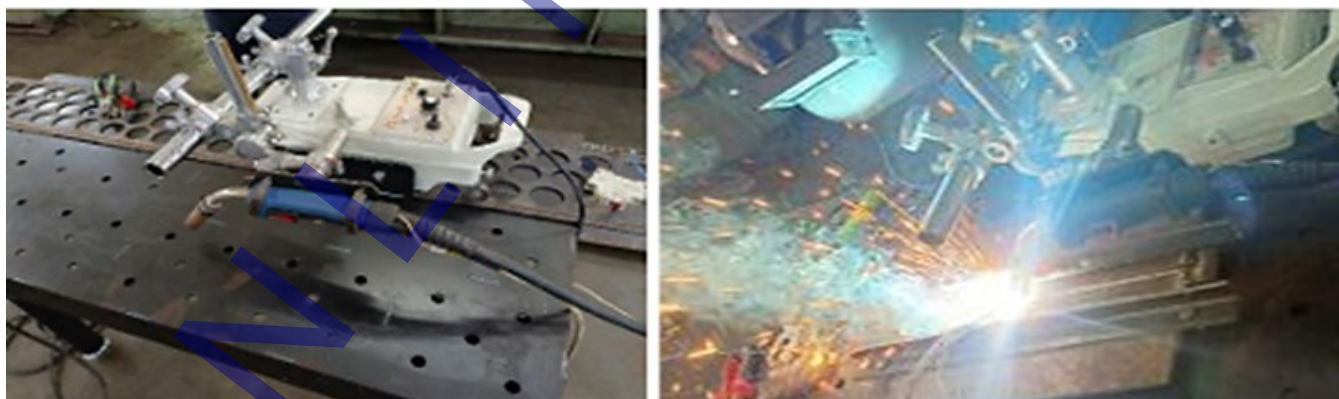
Robotic GMAW welding: (a) welding setup and (b) welding operation
